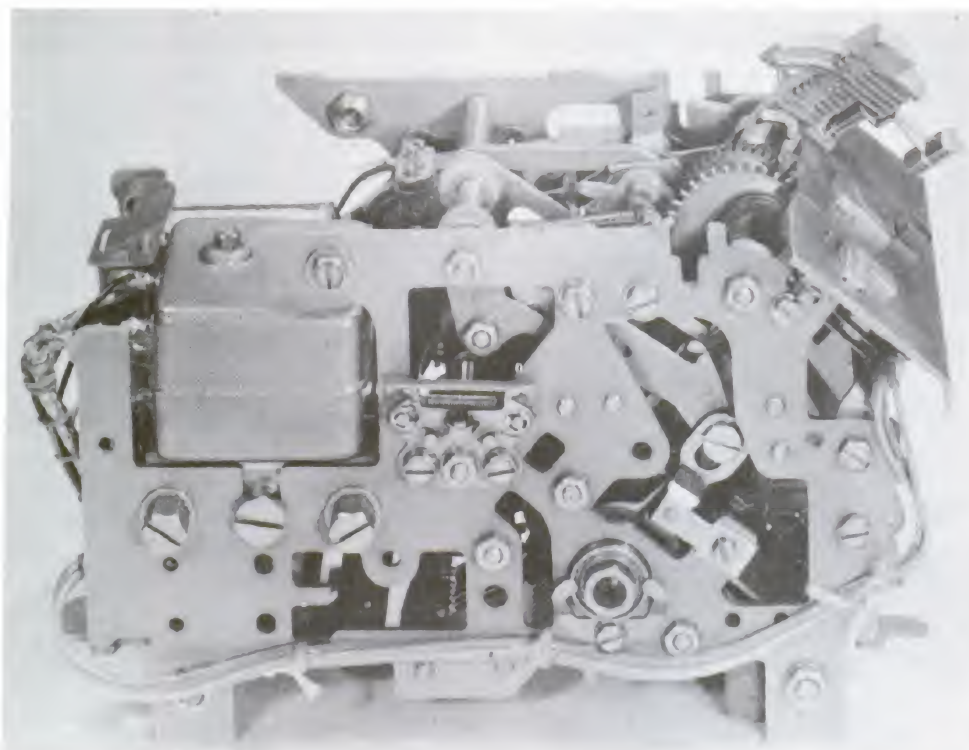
Transmitter distributor (top plate and cover plate removed).
